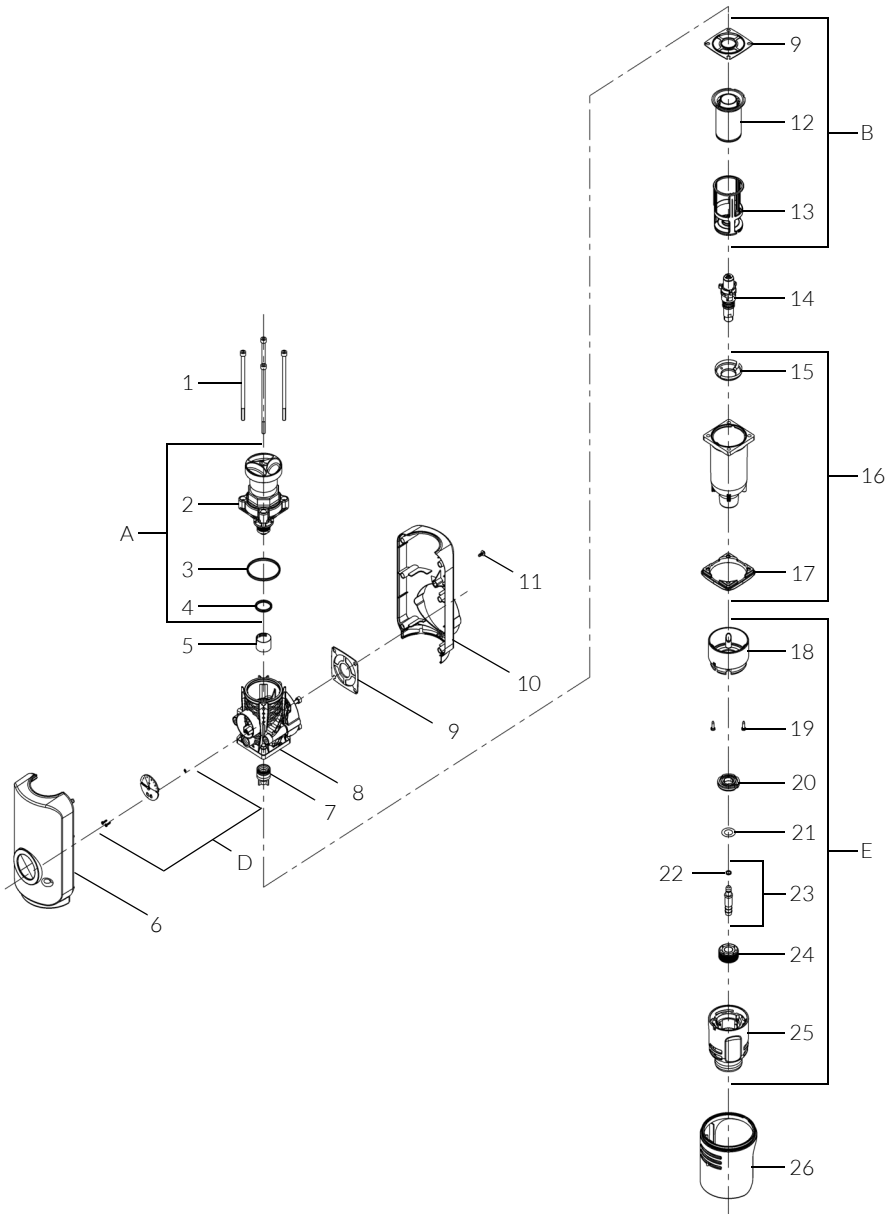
Spare parts CLEAR 2.0 RD 3/4" - 1 1/4"
